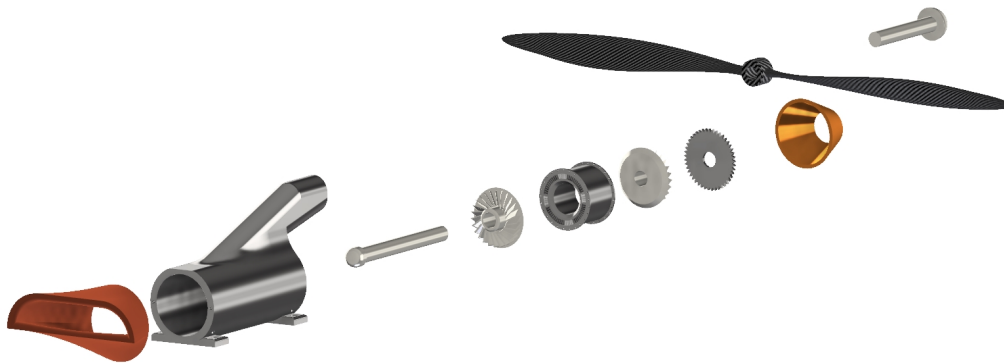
Exploded view of the engine showing the radial compressor and turbine as well as the combustor, gearbox and propeller.
